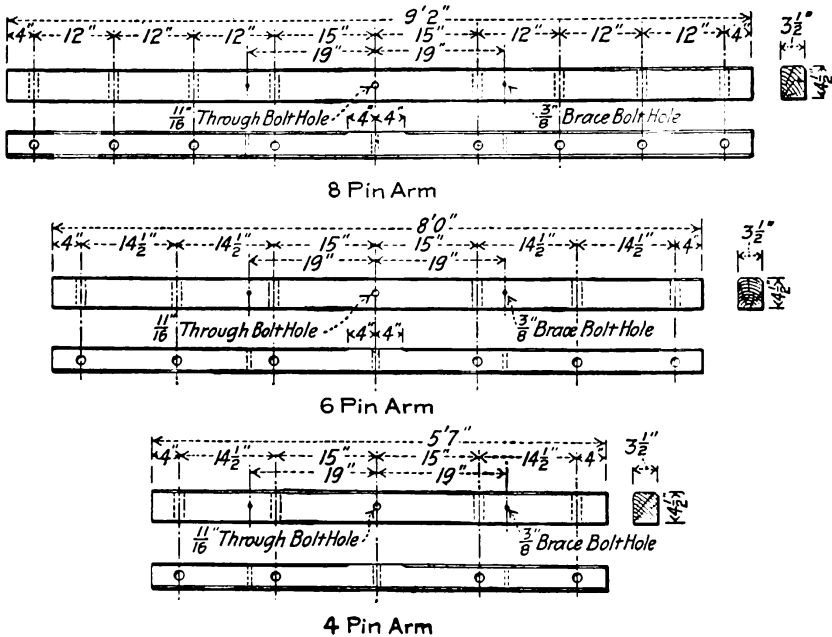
Cross-arm dimensions recommended by the N. E. L. A.
